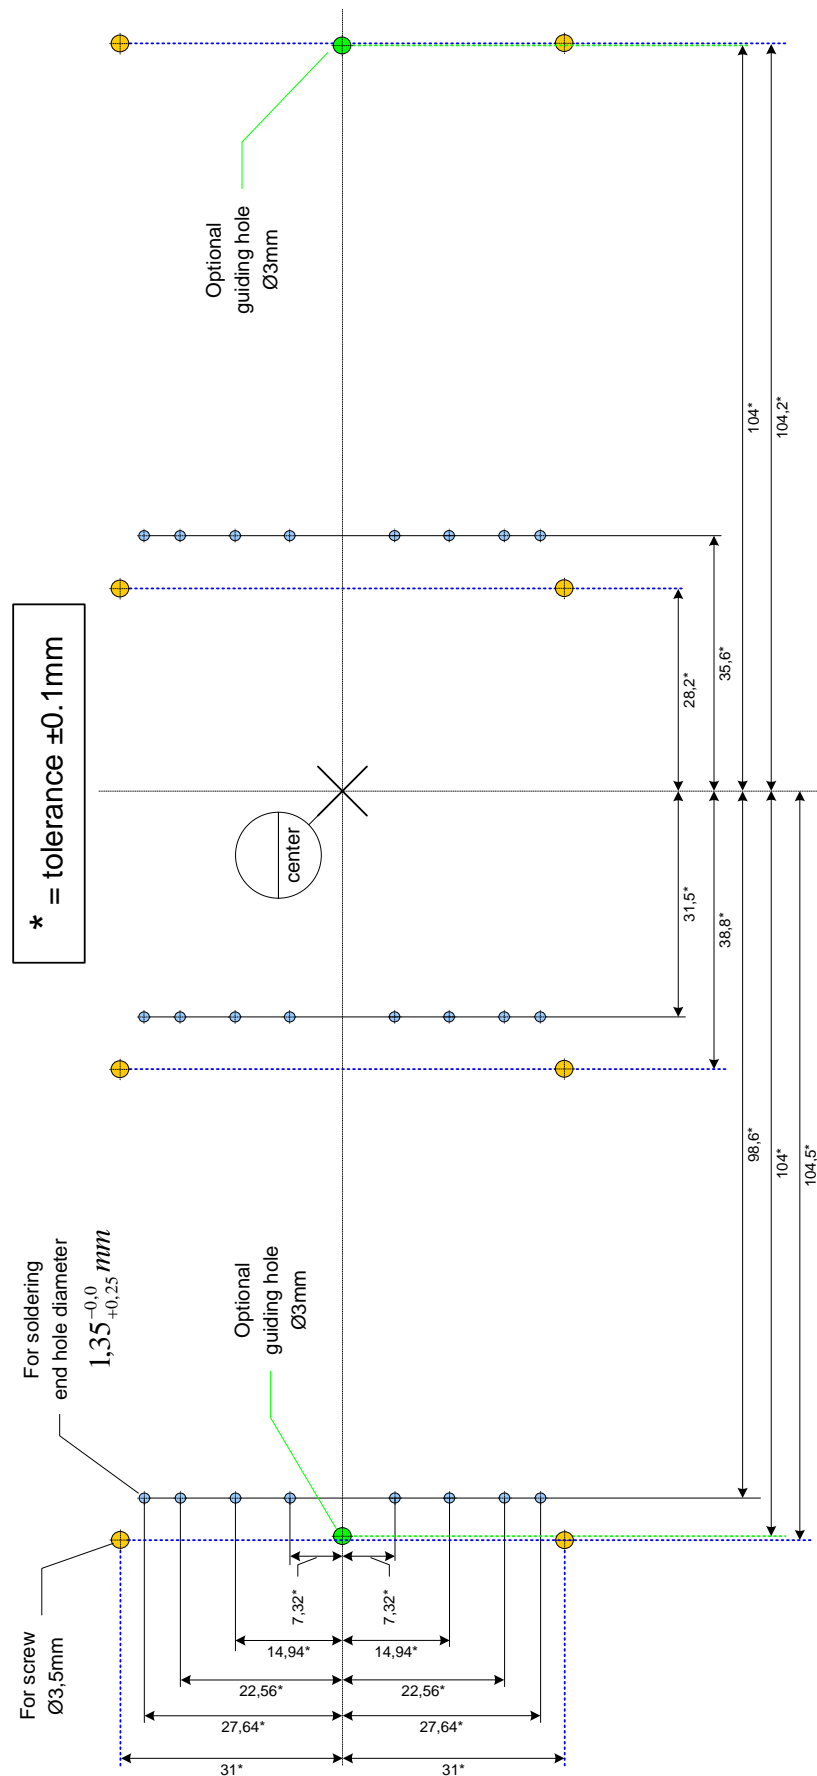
Proposal for designing a driver board for HybridPACK™ 2 module.
